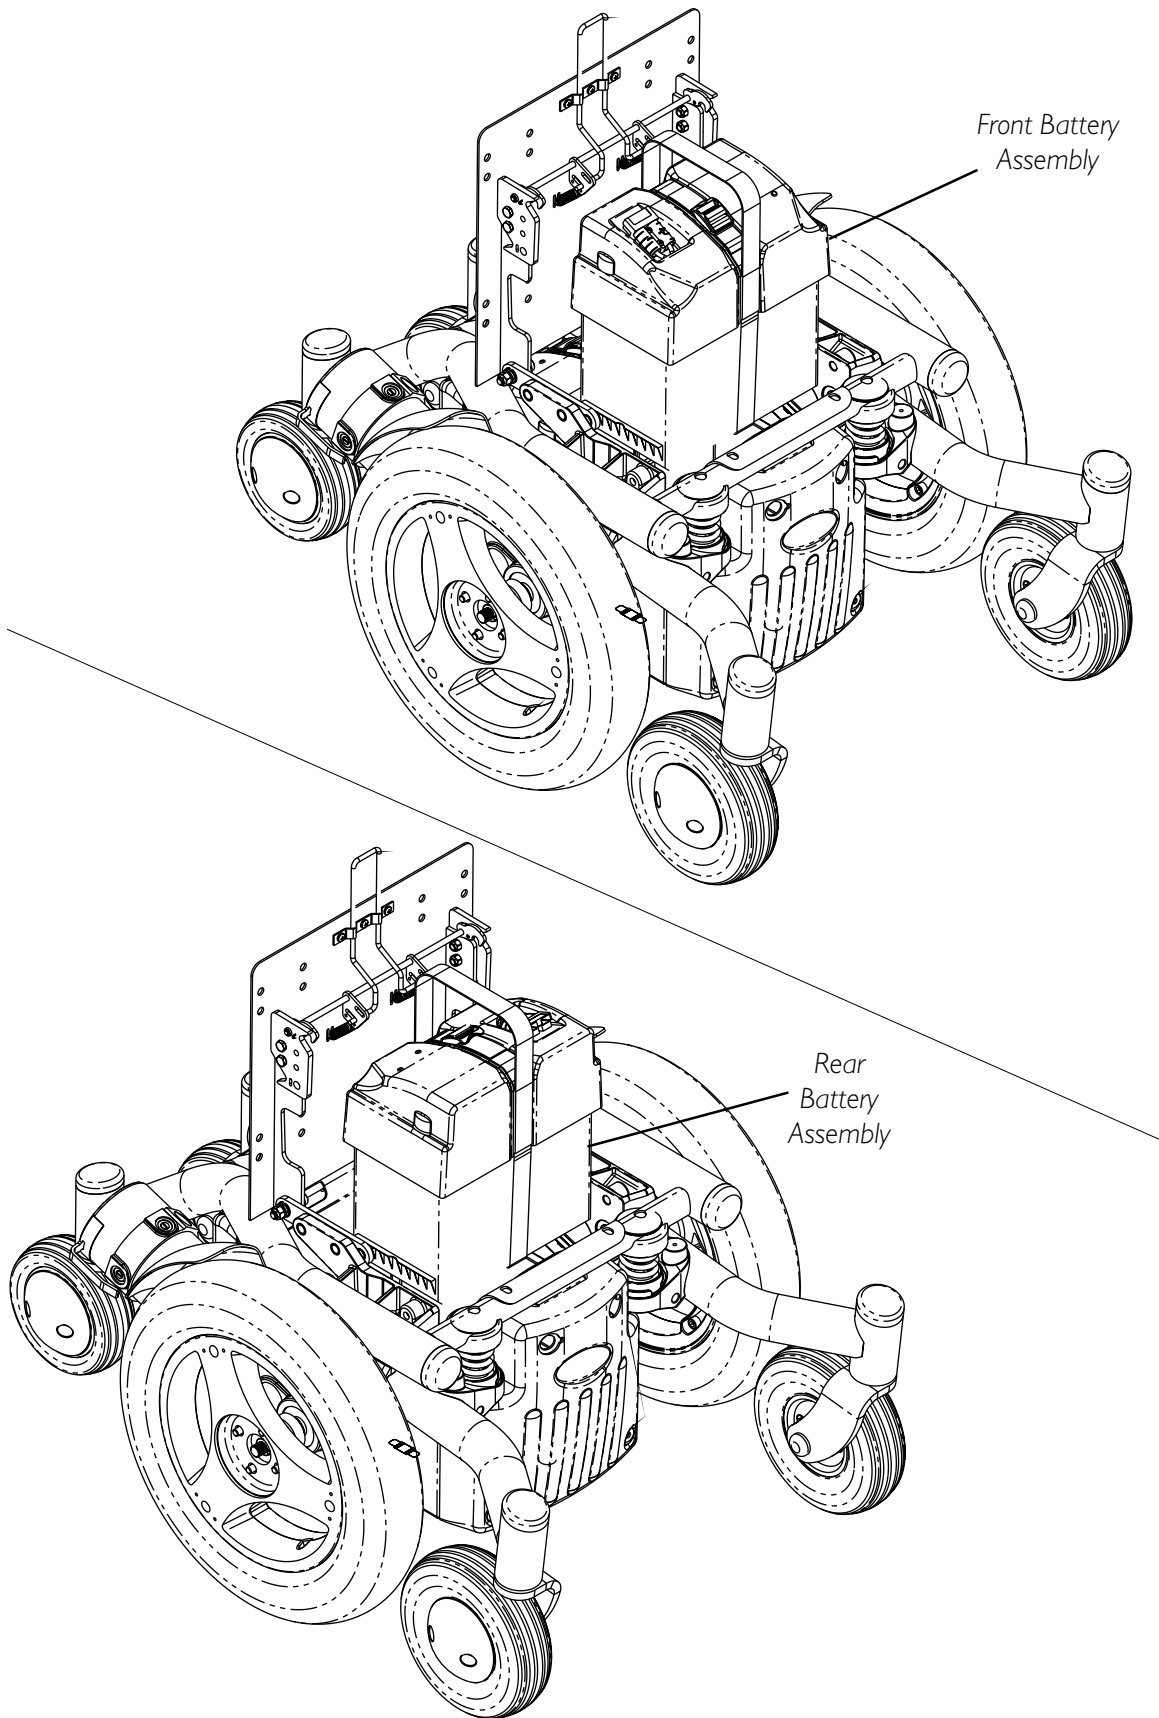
REMOVING/INSTALLING BATTERY ASSEMBLIES
